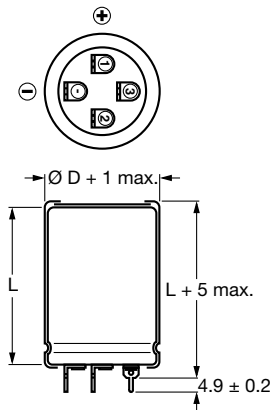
Printed wiring pin version (case Ø D = 35 mm)
